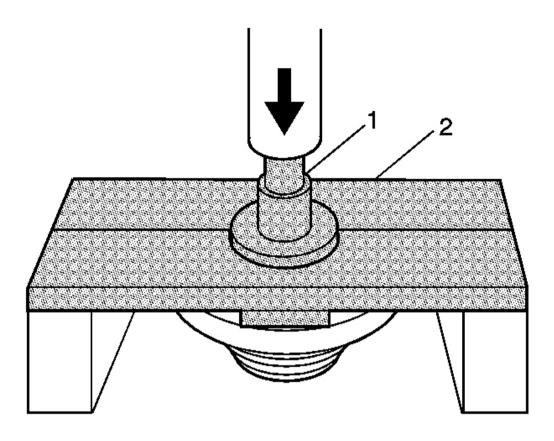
Left Differential Side, J 44379 & J 44381 Courtesy of GENERAL MOTORS CORP.
